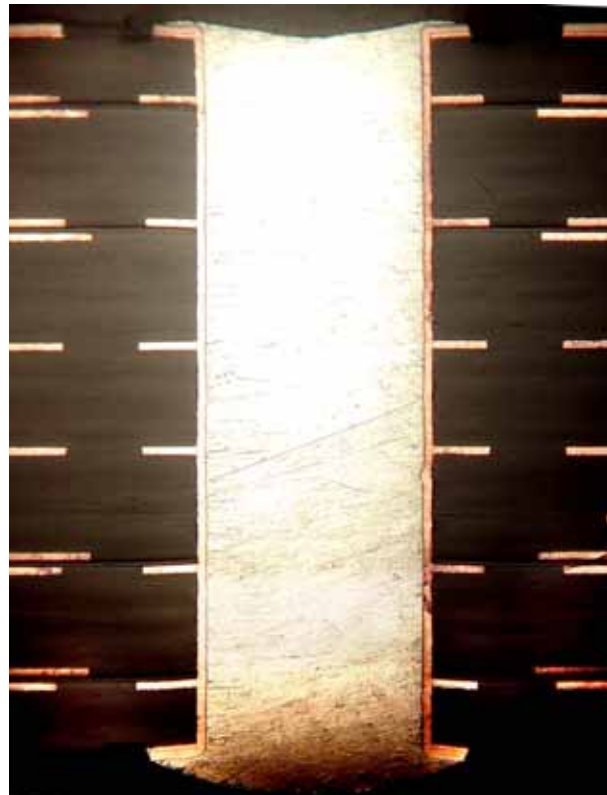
Cross section at a via with 1-mil HK04 laminate after 6x solder shock. Photo courtesy of Benchmark.
